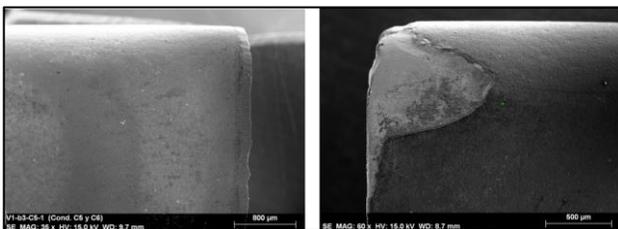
Serious flank wear (right image) VS cutting tool from the test C
